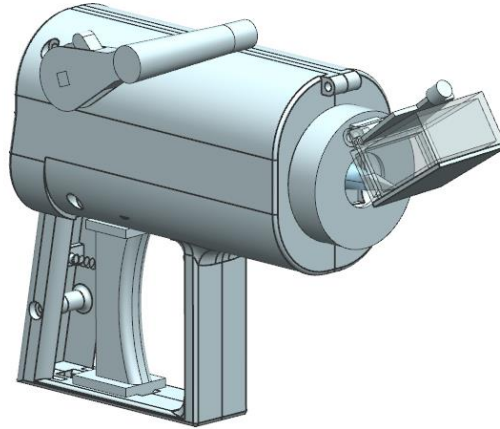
MACS-Tool Full Assembly Right-Hand Configuration
